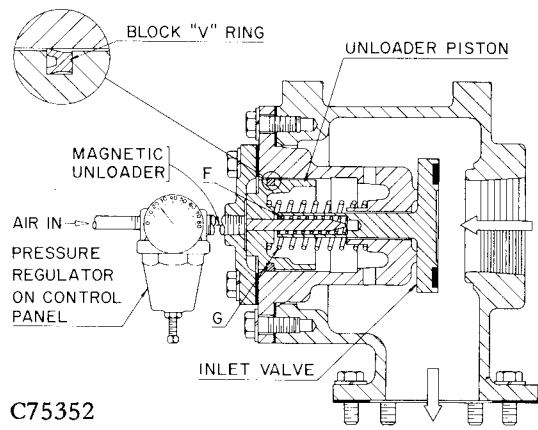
INLET VALVE FOR DUOMATIC CONTROL
